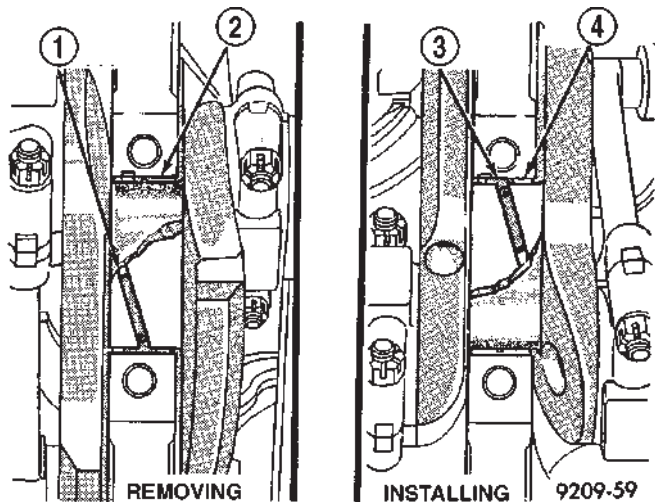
Upper Main Bearing Removal and Installation with Tool C-3059
